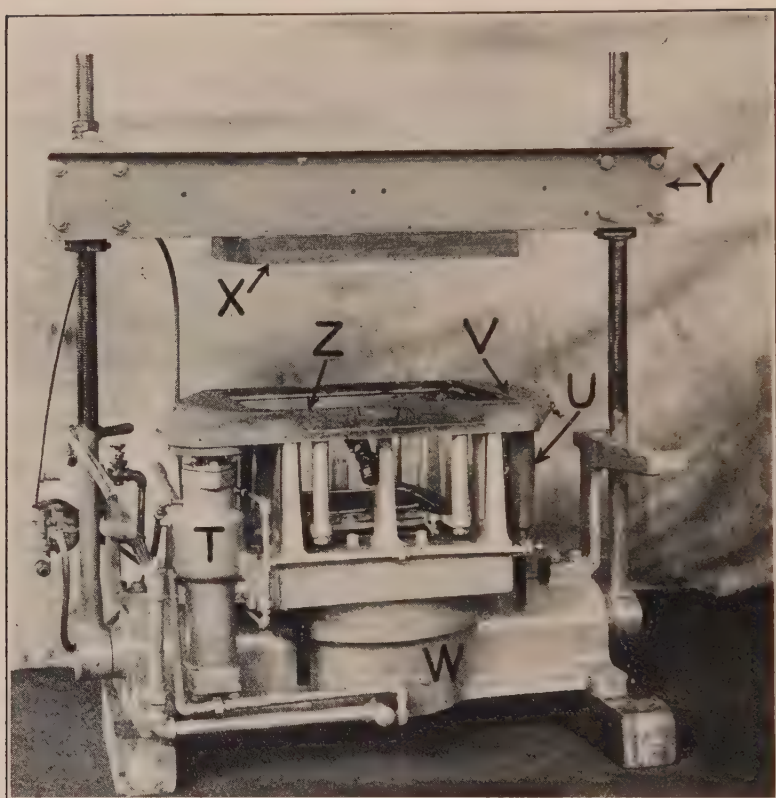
Mumford's Combined Jolt and Squeezer Ramming Machine.
